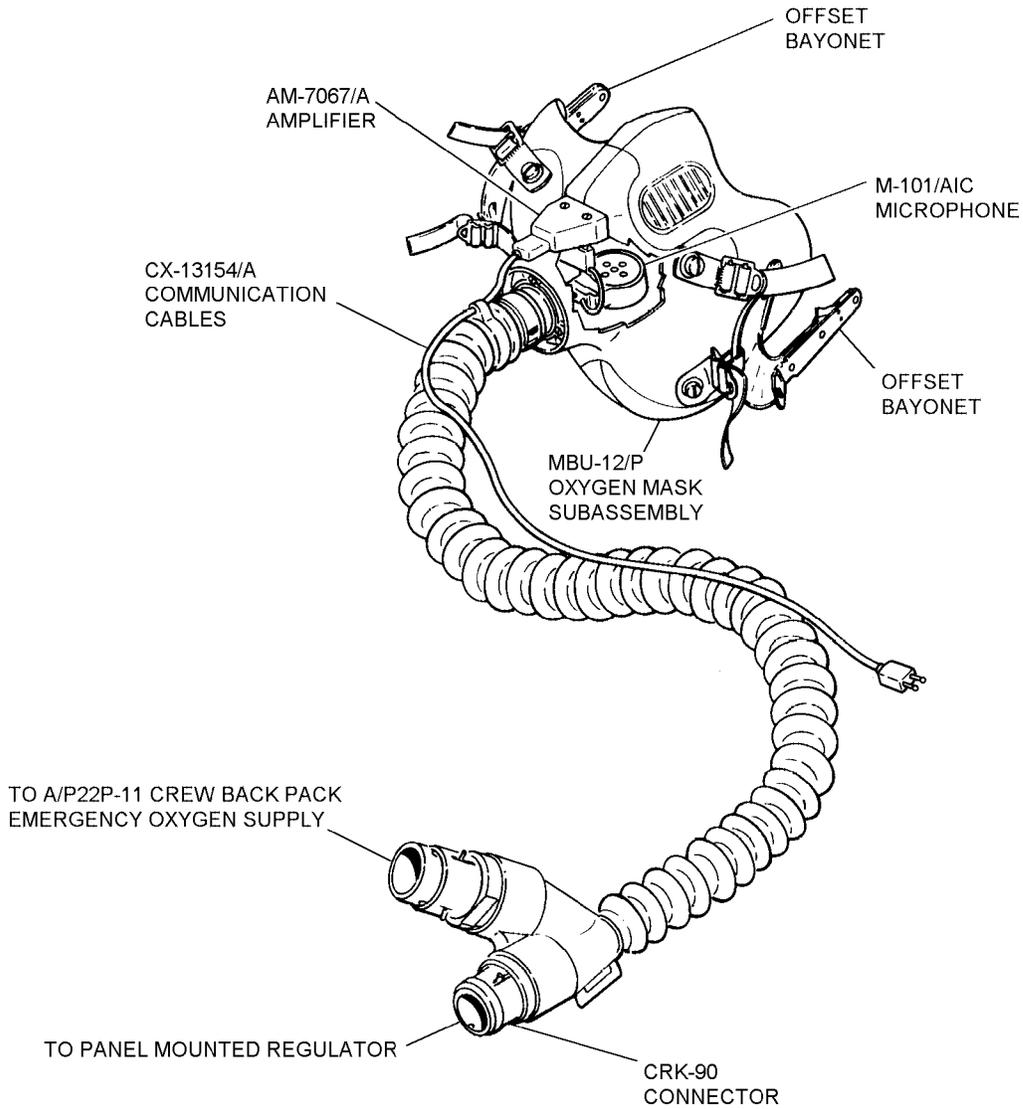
MBU-17(V)5/P Oxygen Mask Assembly (E-2C Aircraft)
